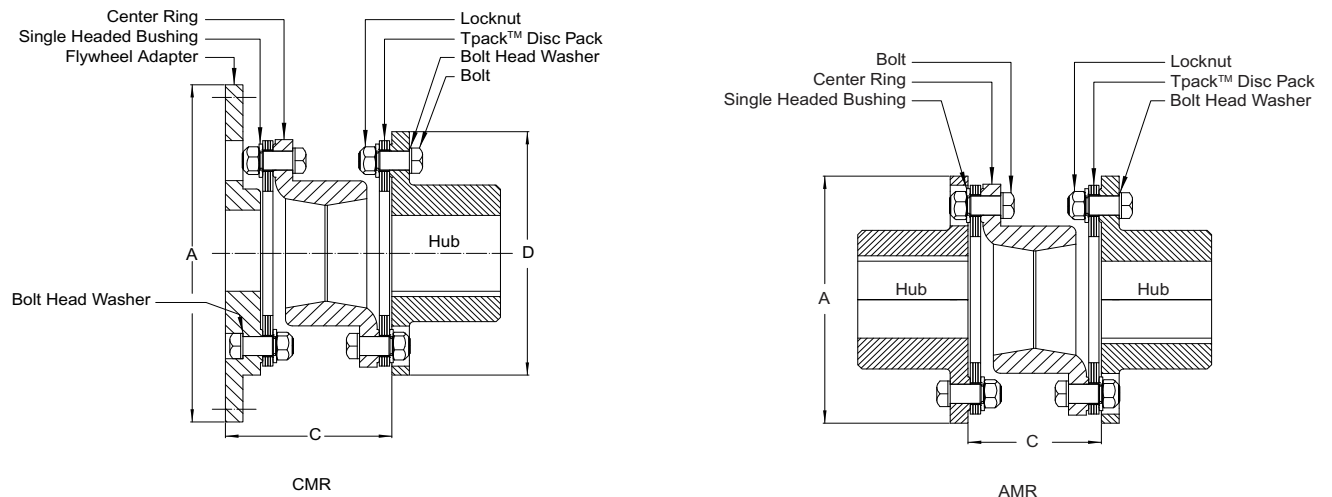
Thomas CMR and AMR TPack Cross Sectional View of Components
